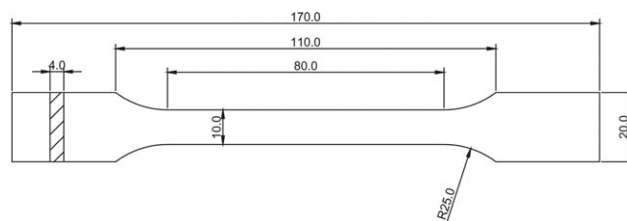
A detailed description of the molded sample. Units are in millimeters.
